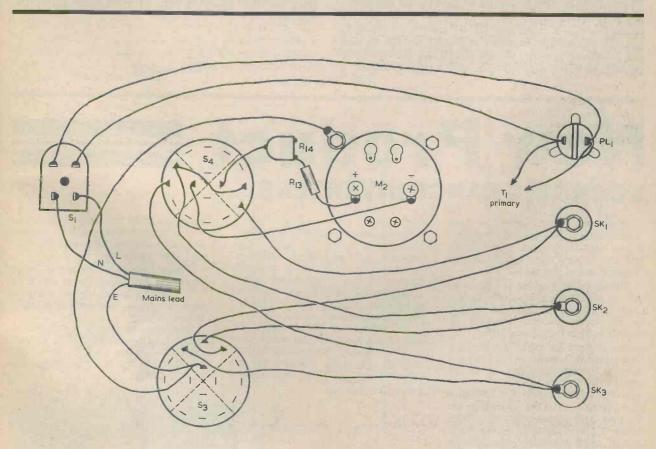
The remaining wiring behind the front panel. The mains earth wire connects first to the arm of S3 and then to chassis by way of the solder tag secured under one of the mounting nuts of M2
